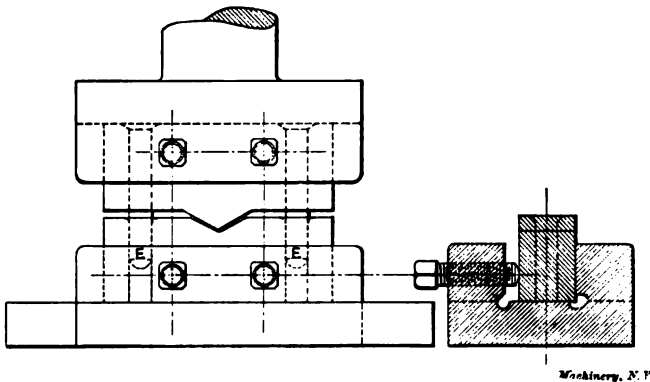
Simple Form of Die Holder adapted to Bending Dies
